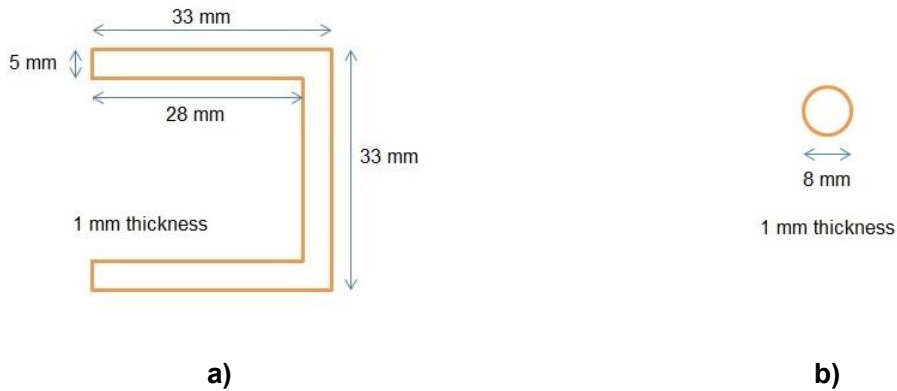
Dimensions of the U-shape sample (a) and disc sample (b)
